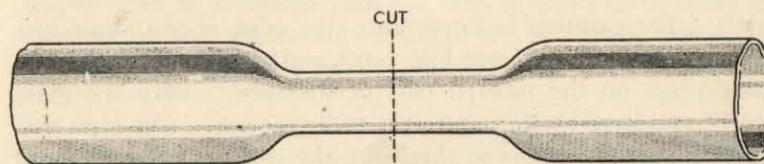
THE TUBE, WHEN COOL, IS CUT IN THE MIDDLE
